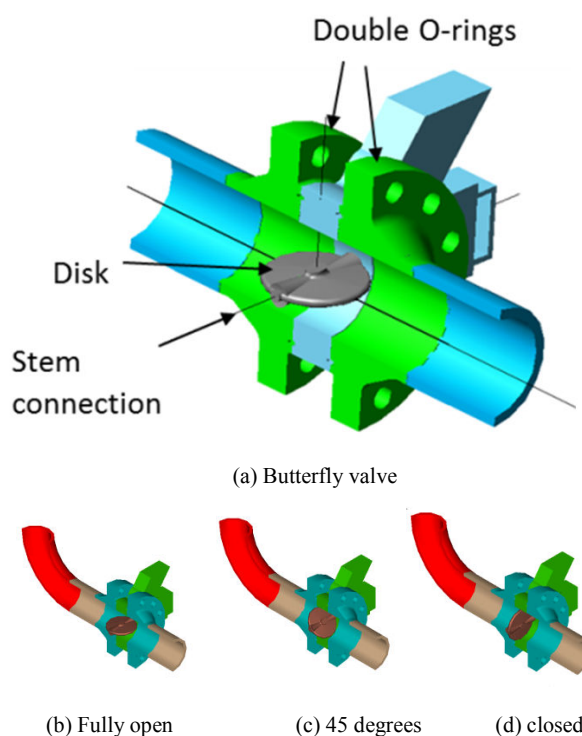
(a) Butterfly valve and its components (b)-(d) Shaft axis and rotation in relation to elbow
